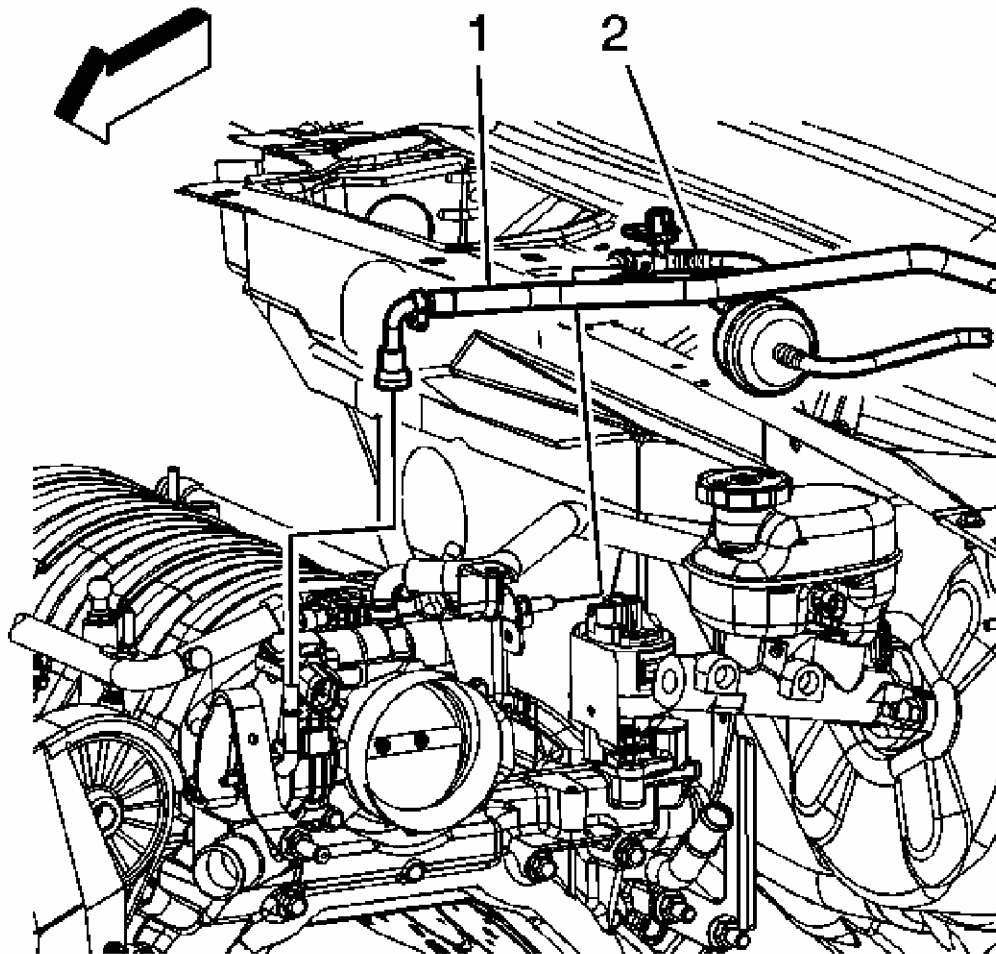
Identifying Fuel Feed Pipe & EVAP Line Quick Connect Fitting
